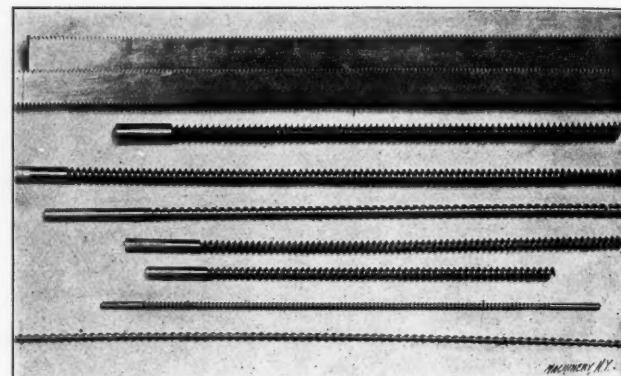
Method of Testing Accuracy of Pitch of Thread, and Examples of Threaded Work of Small Diameter.
